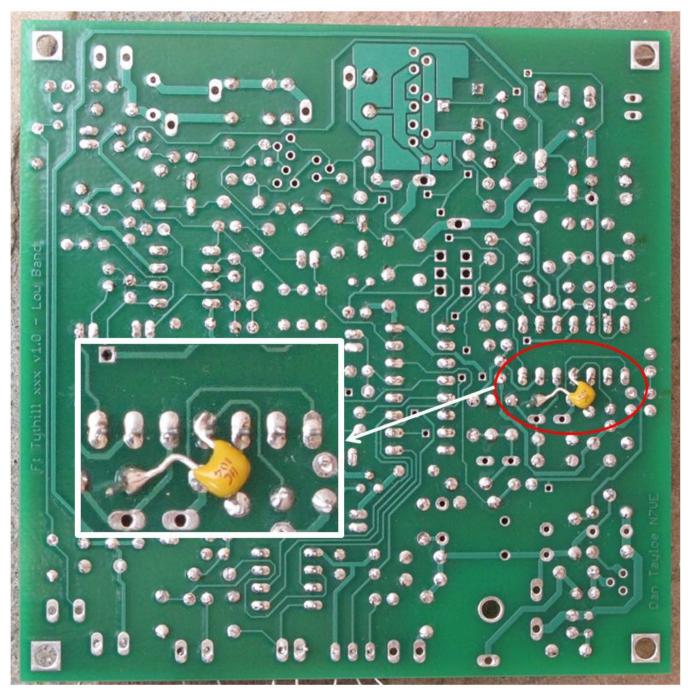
Installation details of the 0.1 uF bottom side cap. Trim all leads when finished.
